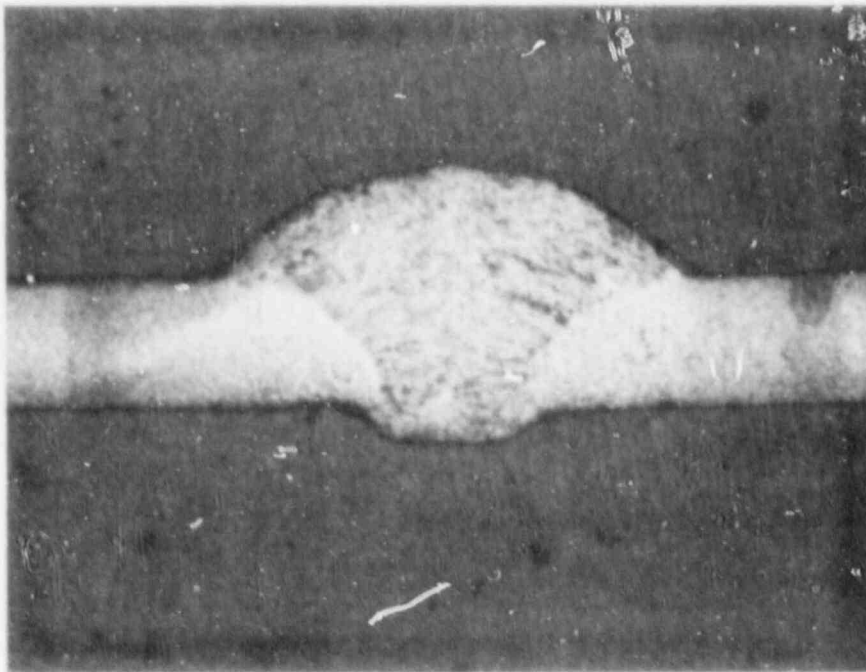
Cross-section of weld between cylinder sections (flat position 10x)
